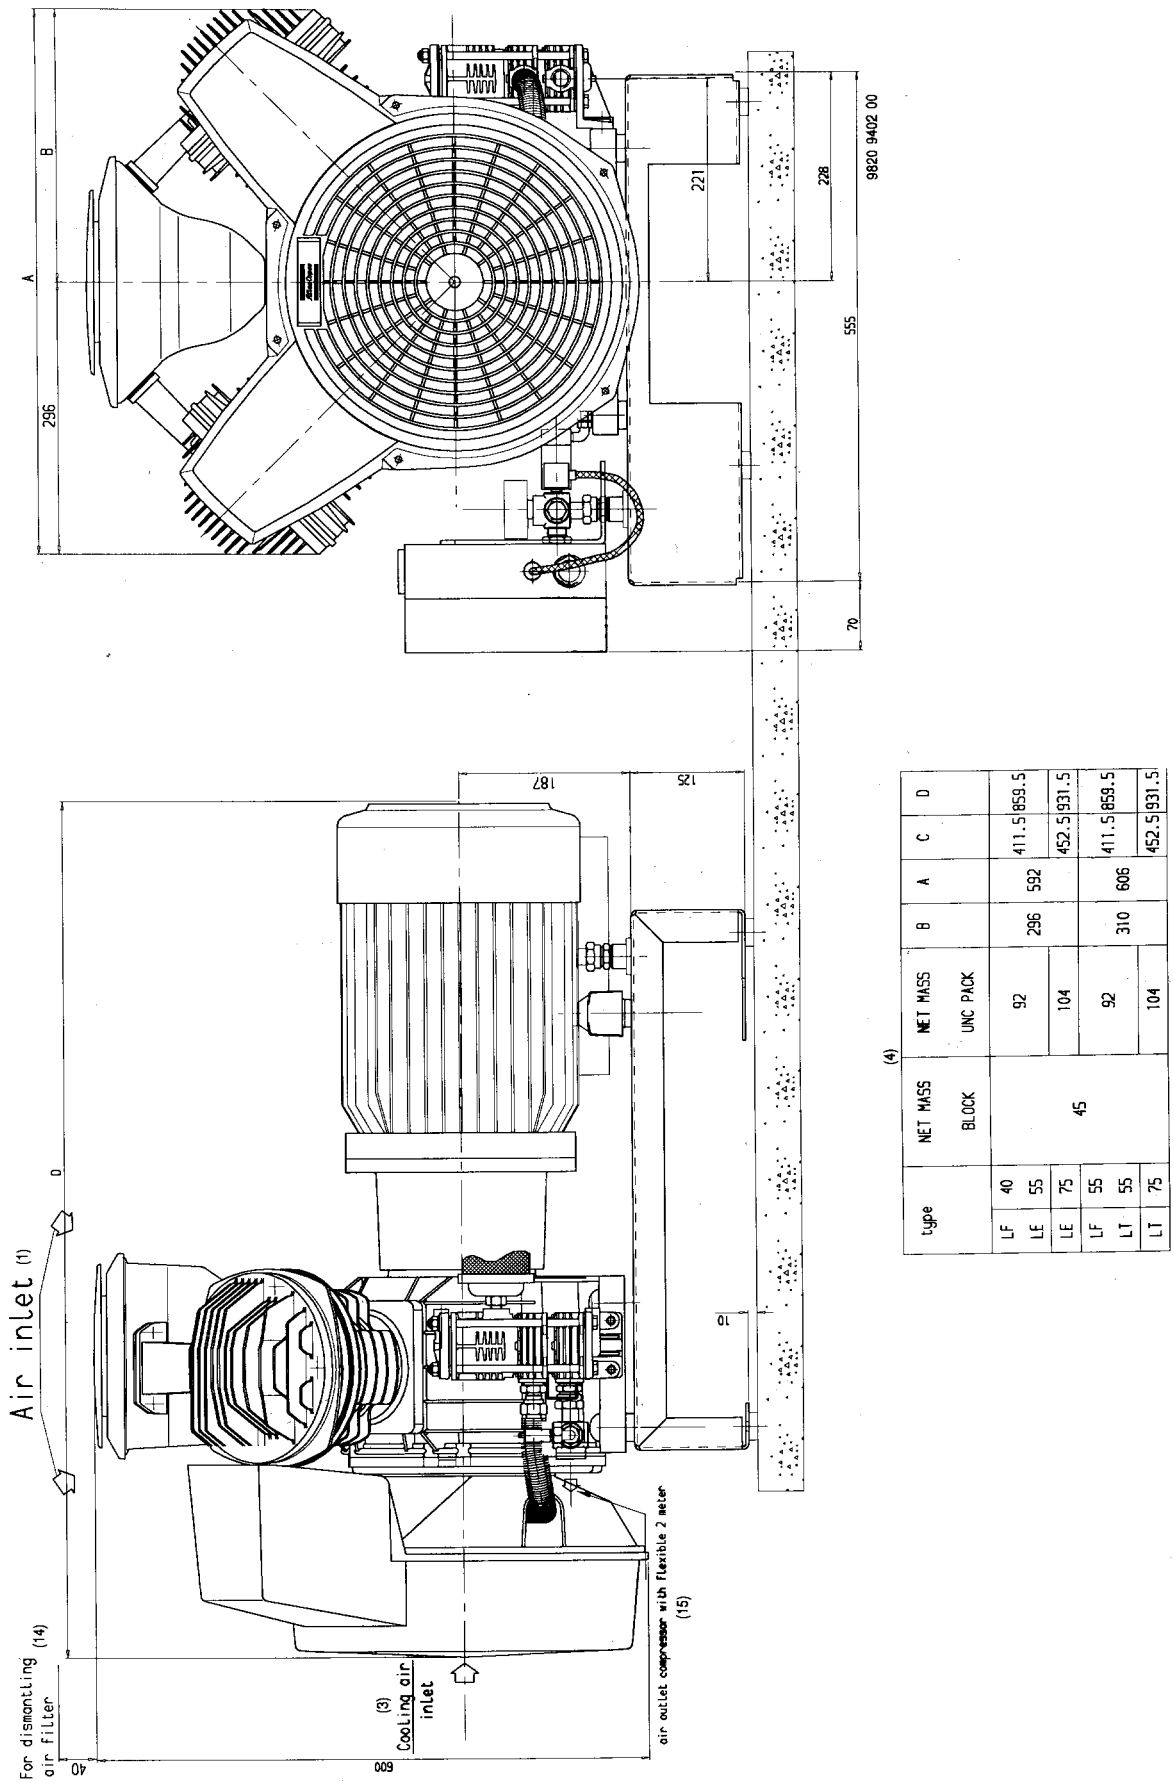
Dimension drawing, LE/LT55/75 and LF40/55 Unsilenced Pack
